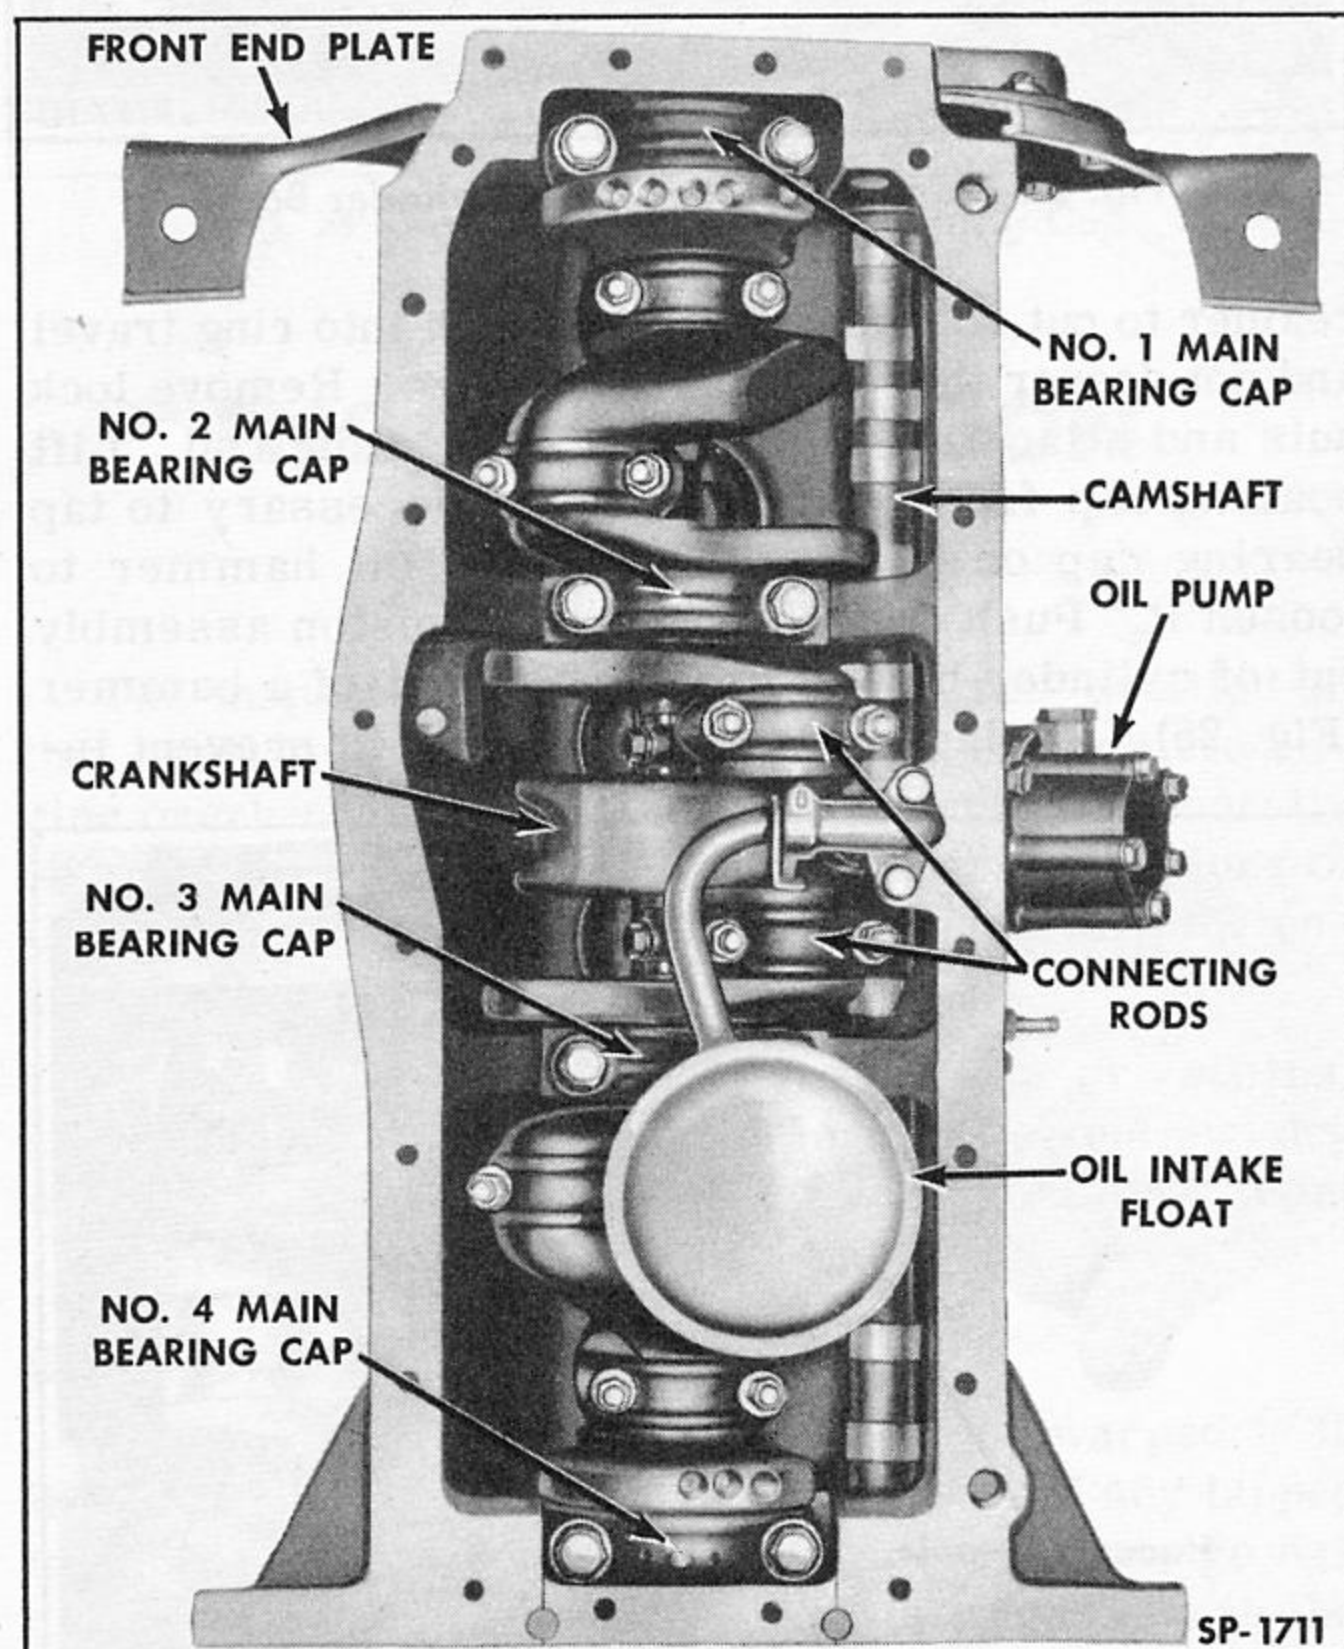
Underside of Engine with Oil Pan Removed—6 Cylinder Shown
